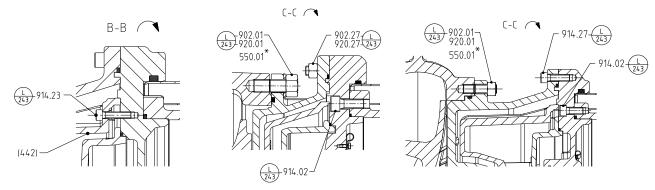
General assembly drawing of Amarex KRT, fastening of cooling insert and discharge cover depending on the motor size
